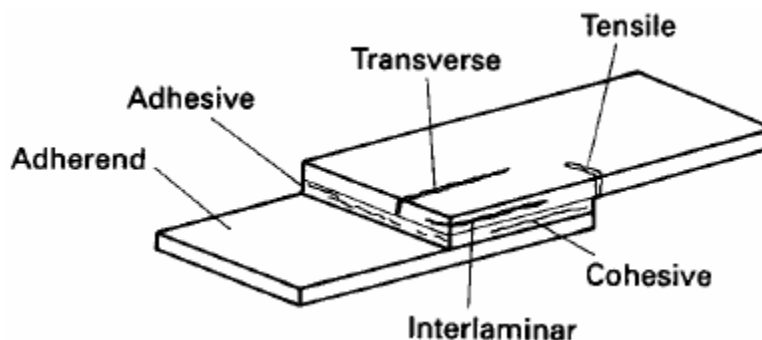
Failure modes of a bonded connection (Kolstein, 2008)
